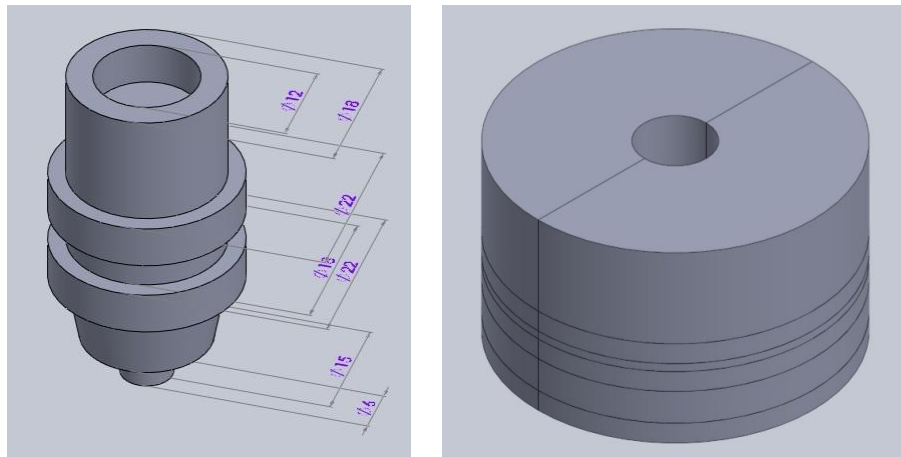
Die design using the dimensions of Collet chuck holder
